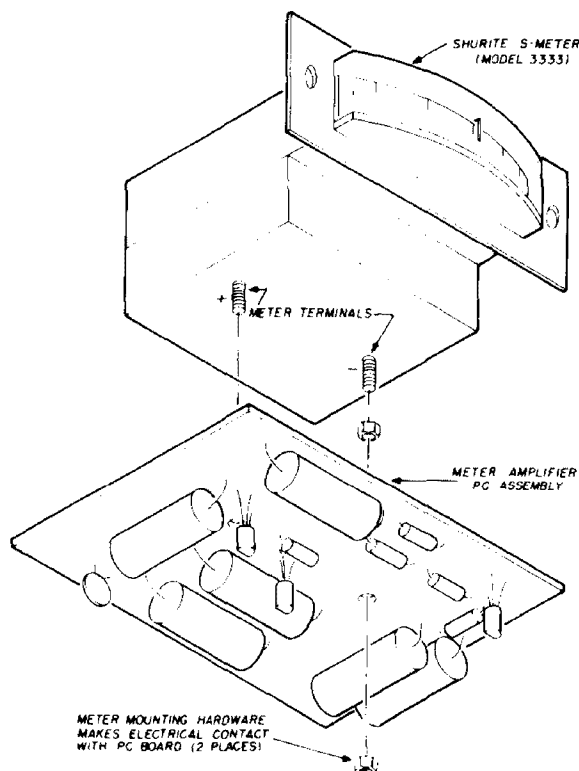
Construction of the 5-mA S-meter circuit shown in fig. 4. Printed-circuit layout is shown in fig. 7.
